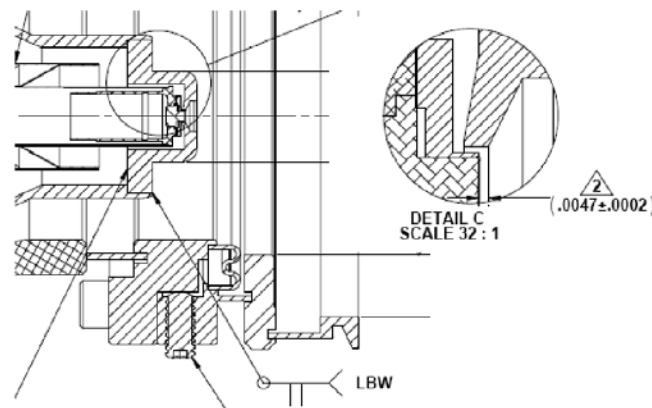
Drawing showing laser beam weld of focus electrode and required dimensional precision
